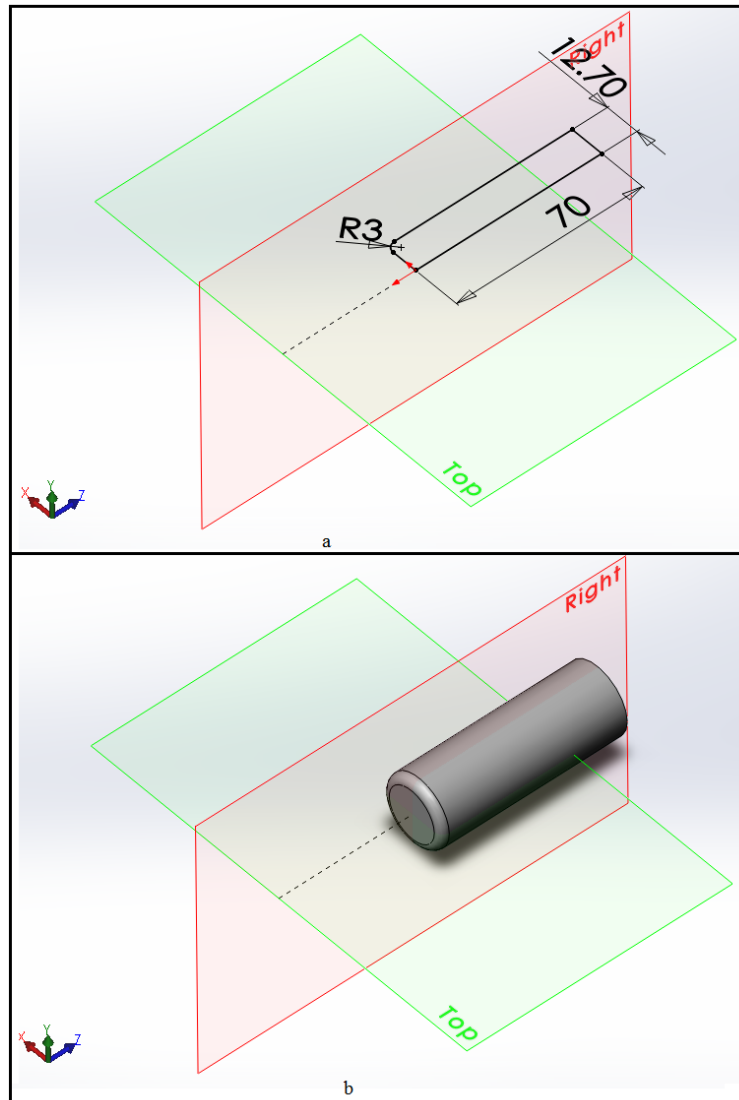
Output of macro for torus end mill tool. (a) Sketch formed (b) Revolve command to generate final end product
